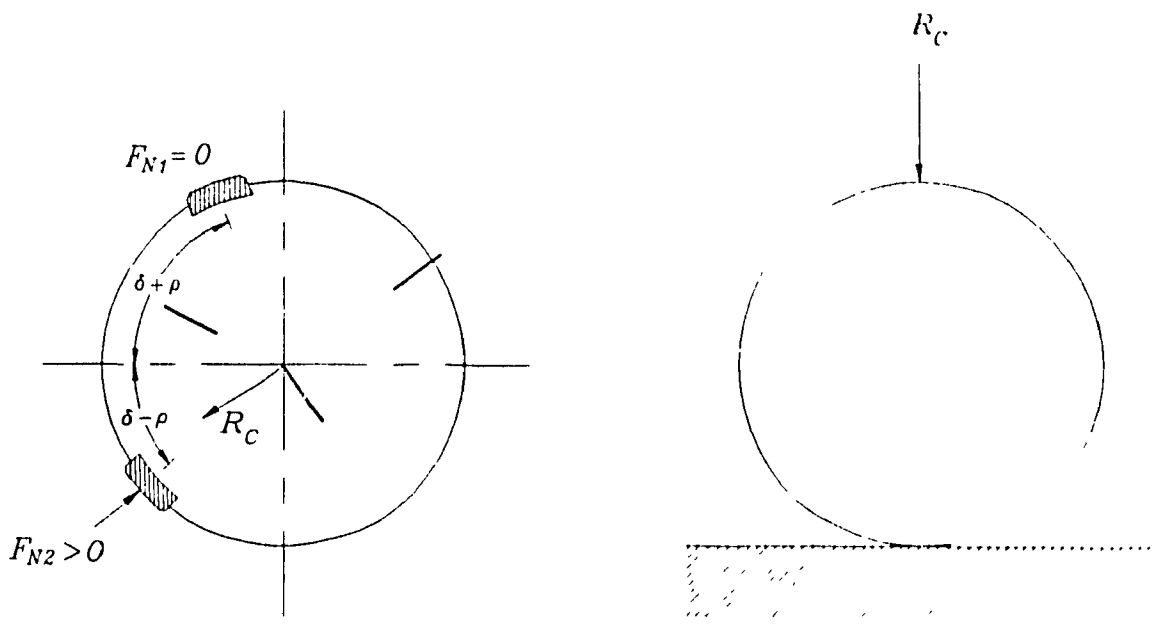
Model of Cutting Tool-Boring Bar Assembly at Indifferent Equilibrium
